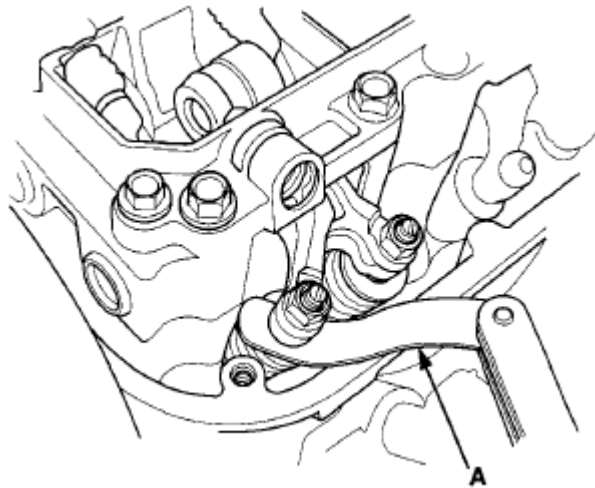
Inserting Feeler Gauge Between Adjusting Screw - Intake
